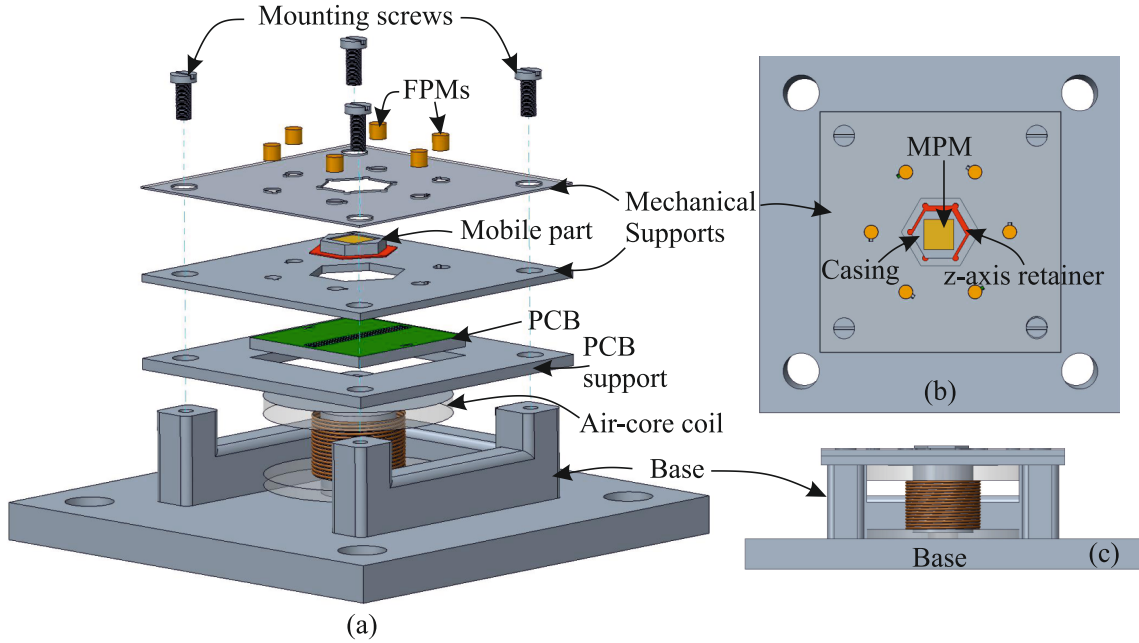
CAD model of a 3D digital acuator with cuboidal mobile magnet. (a) exploded view to visualize arrangements of different parts. (b) Top view of the actuator; (c) Front view of the actuator.
